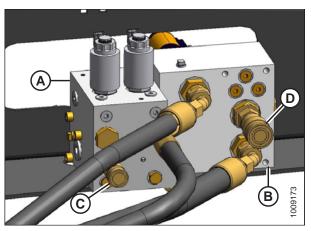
Valve Blocks without Reverser Valve Configured for Auger Header
